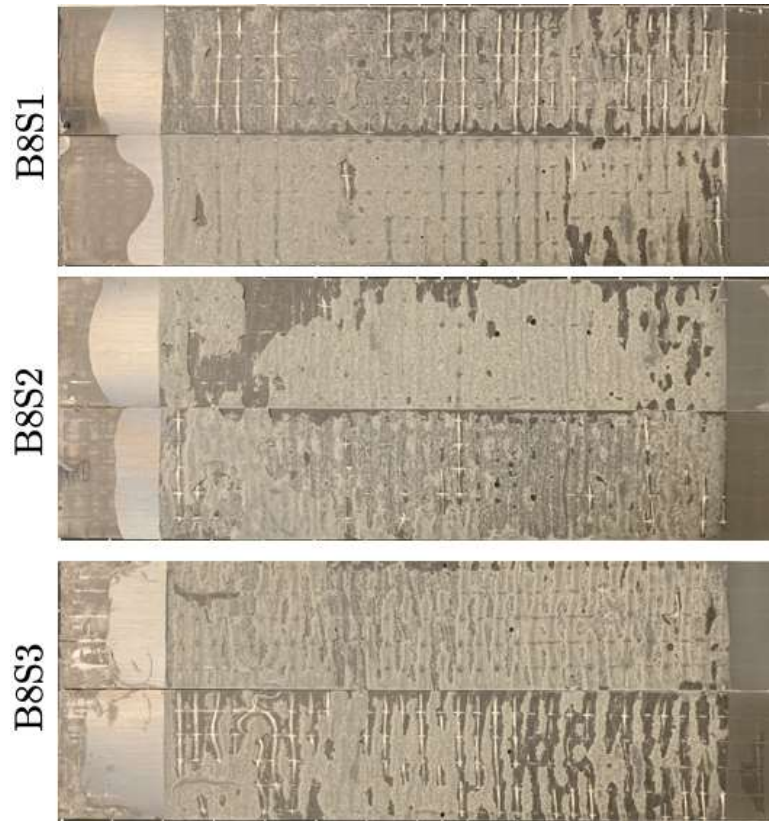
DCB DP190 batch 8 post-testing visual inspection of the fractured surfaces. Crack propagation occurring from right to left.
